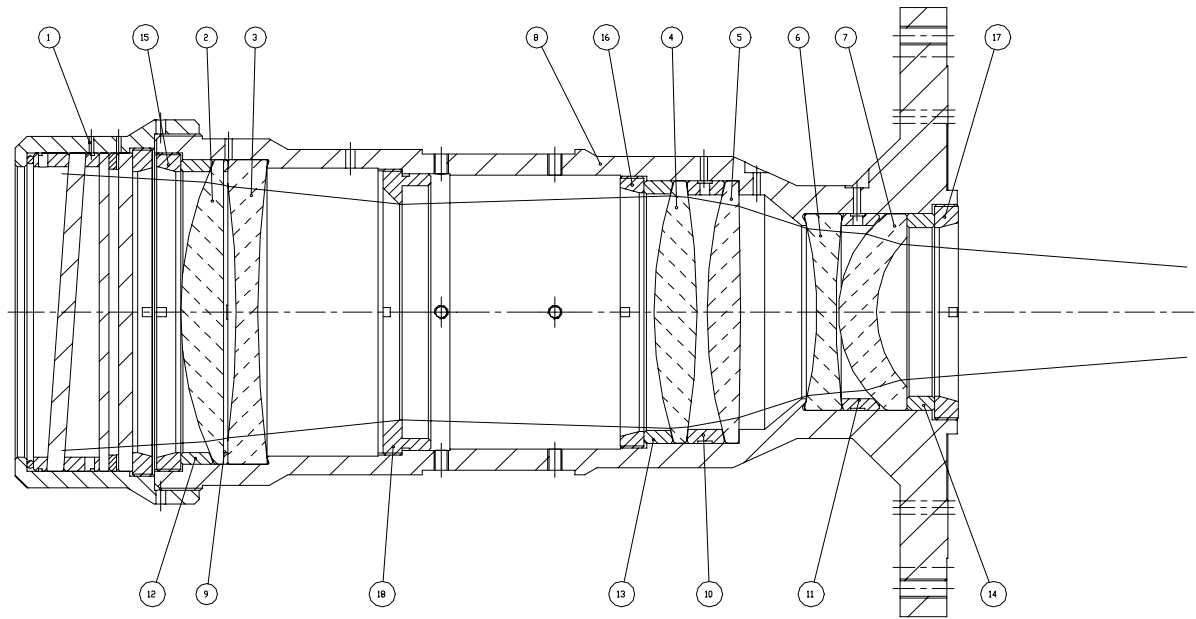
Optical system layout. 1: filter assembly housing; 2-7: lenses; 8: lens barrel; 9-14: spacers; 15-17: retainers; 18: aperture stop
